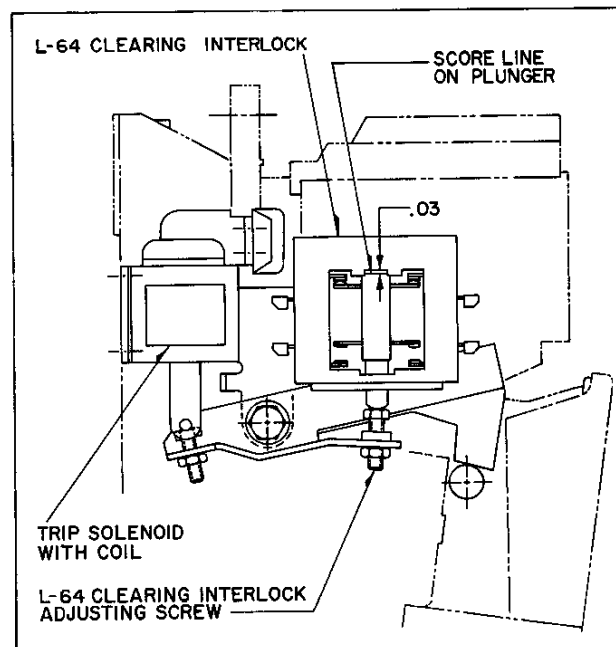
Adjustment of Clearing Interlock - Contactor Open
